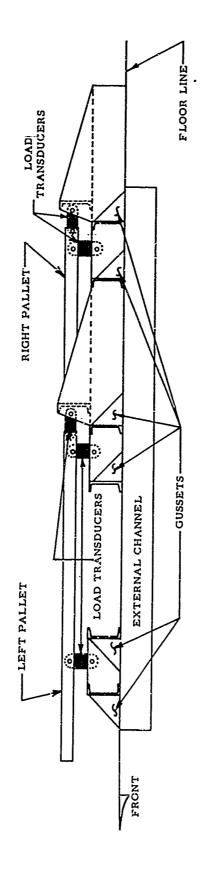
SCHEMATIC SIDE VIEW OF PALLETS INSTALLATION SHOWING TRANSDUCER TIE-POINTS AND FLOOR MODIFICATION
